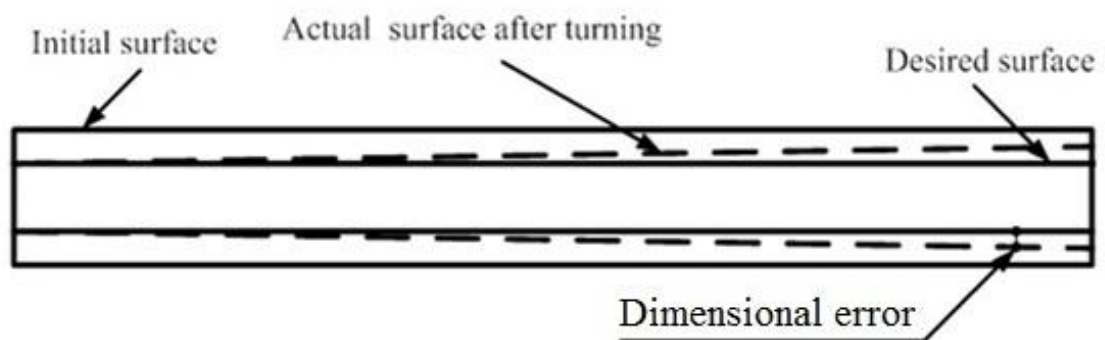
A schematic of dimensional deviation of a slender workpiece
